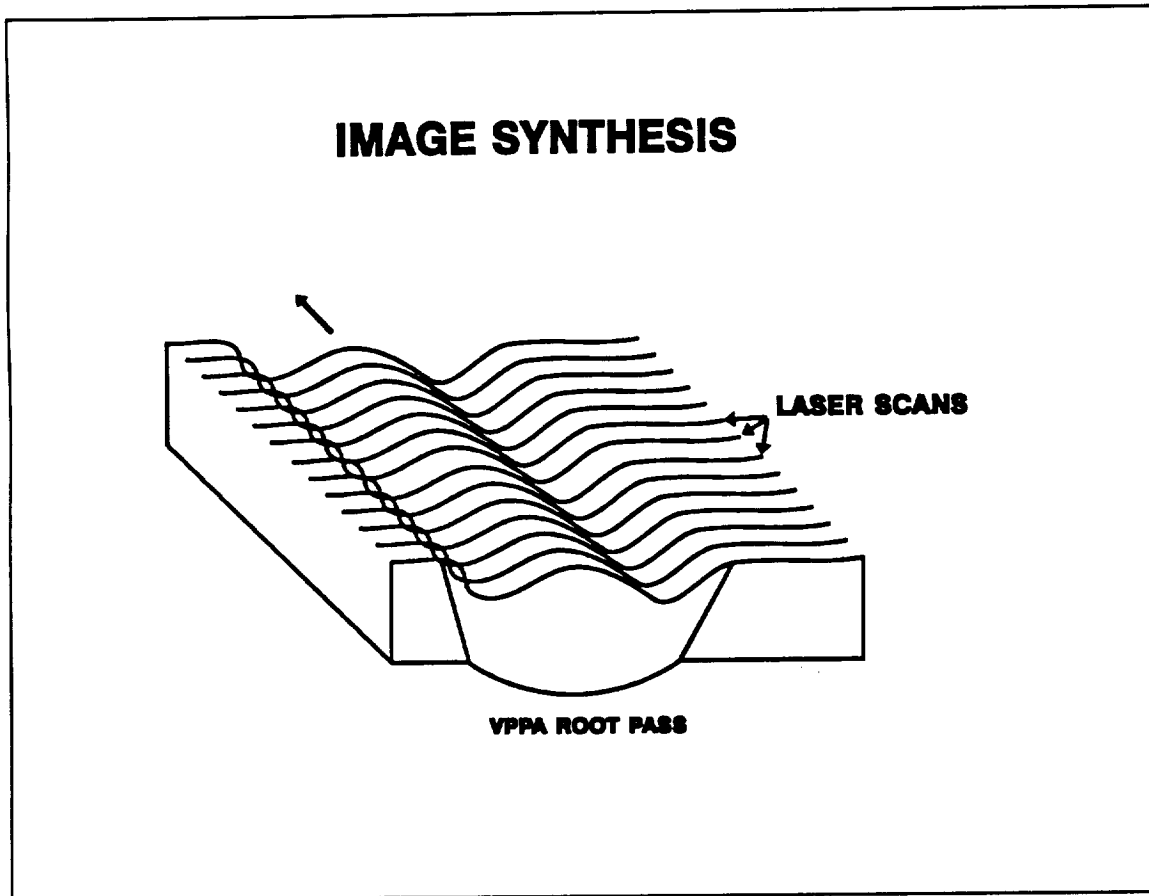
Successive laser scans across a VPPAW root pass may be used to reconstruct a view of the three-dimensional weld bead surface.
